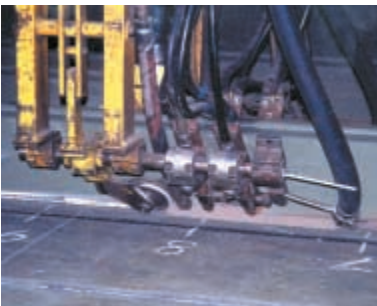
Double-sided SAW welding with OK Autrod 12.32/OK Flux 10.62.
